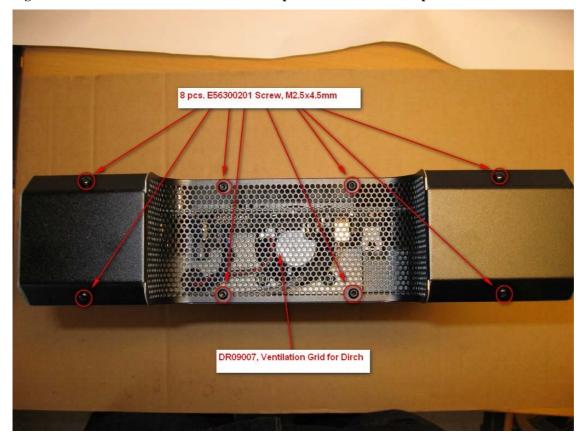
Mount the ventilation grid using eight screws as shown in the picture.
